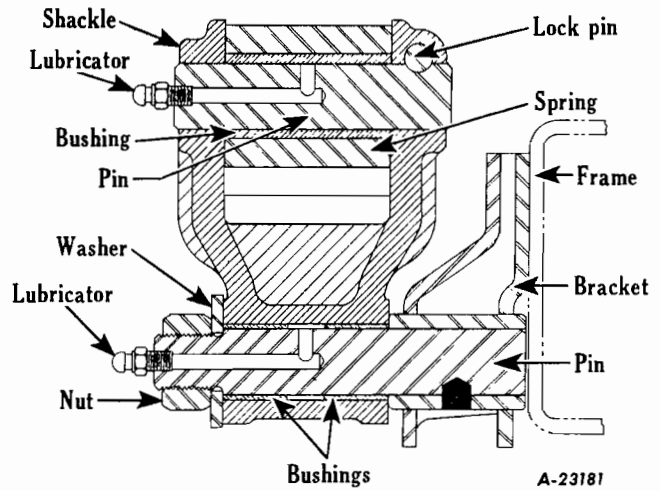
Rear Spring Rear Shackle For Models L-130, LB-140, LM-150.
